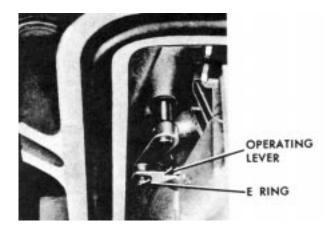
Auxiliary awitch disconnection from operating lever before removal of head casting from operating mechanism.
